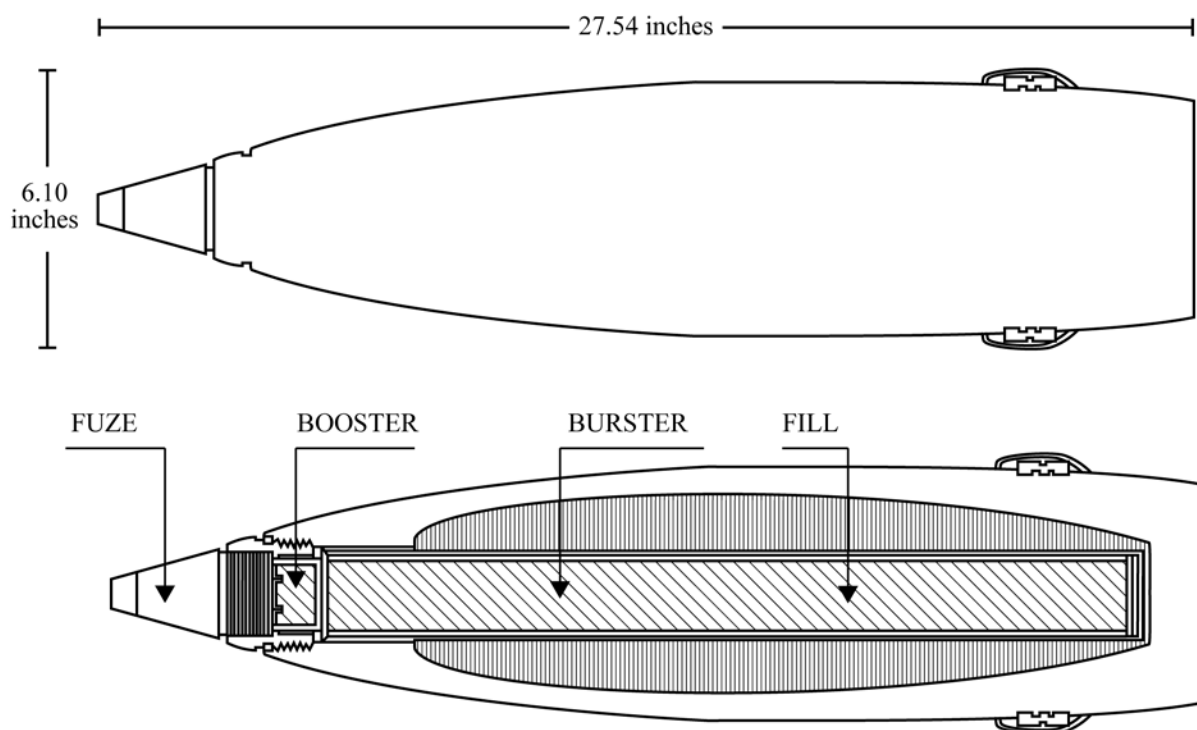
Projectile, 155-mm, Gun, M122 (T179) - Line Drawing
